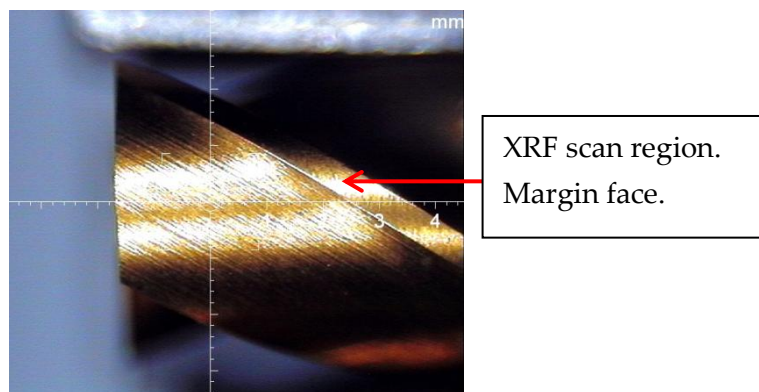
Image showing a TiN Jobber drill inside the XRF machine, pointing to where the scans were acquired.
